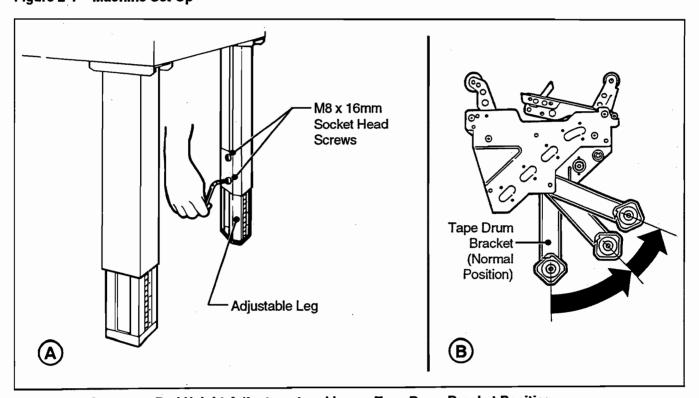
Conveyor Bed Height Adjustment and Lower Tape Drum Bracket Position
